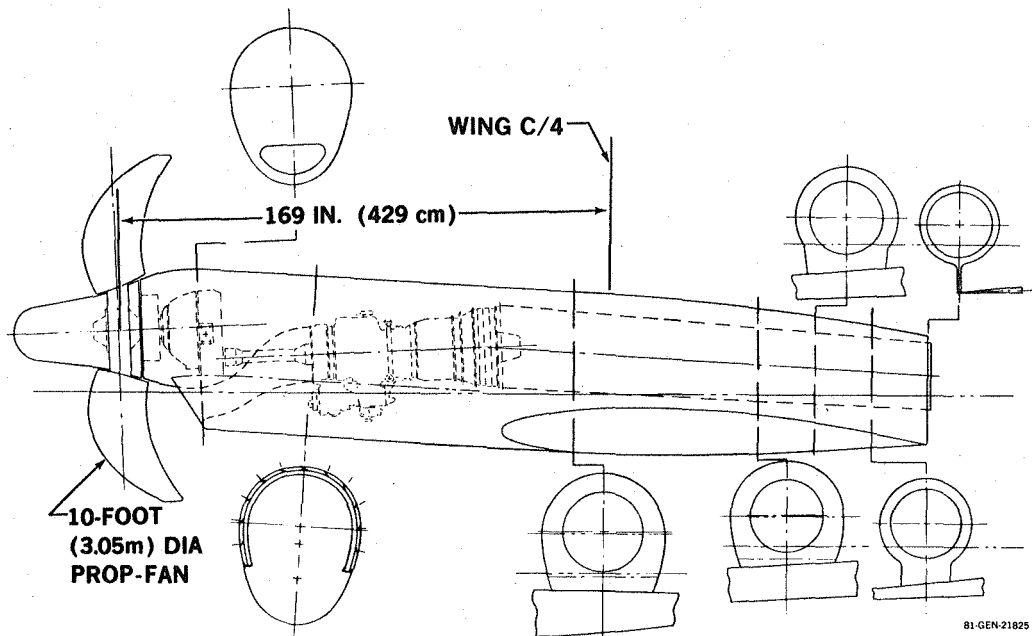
INSTALLATION OF ALLISON T701 ENGINE AND PROP-FAN ASSEMBLY ON DC-9-10 AIRCRAFT WING
